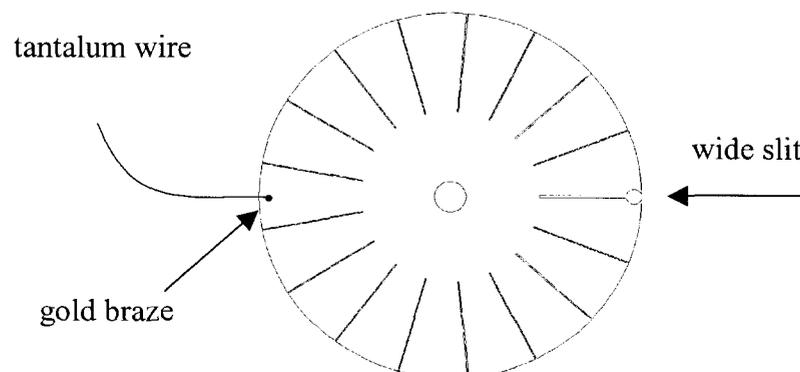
Schematic drawing of tungsten slit disk showing location of braze and tantalum wire.
